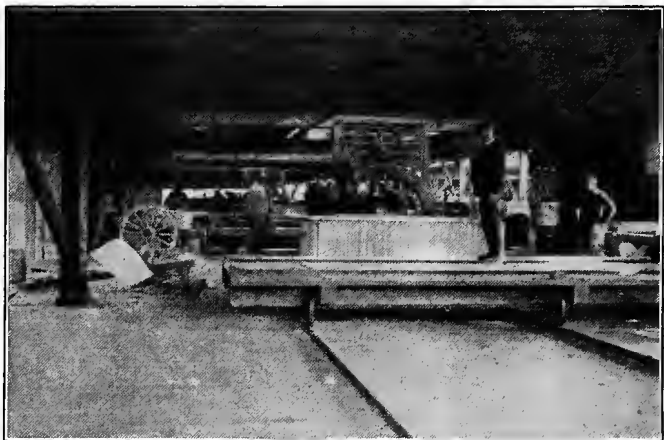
Sectional Carriages in Mill for Handling Heavy Timbers.
